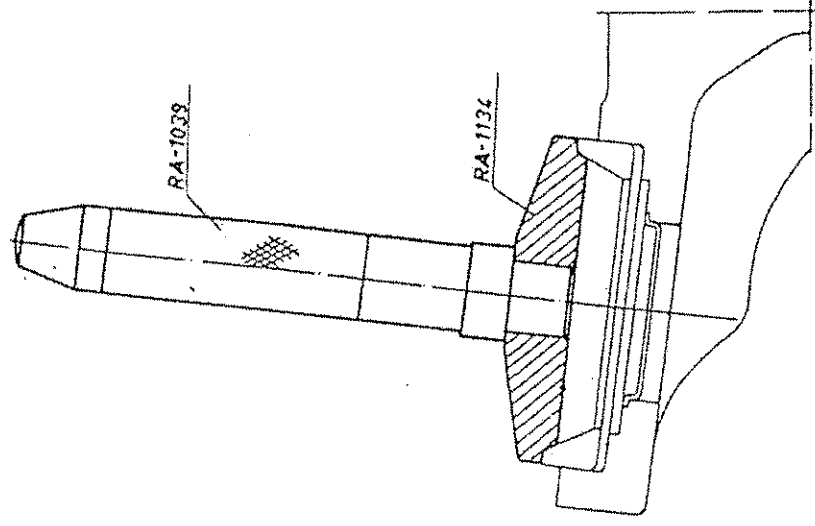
PRESSING IN THE TAPER ROLLER BEARING CUP
